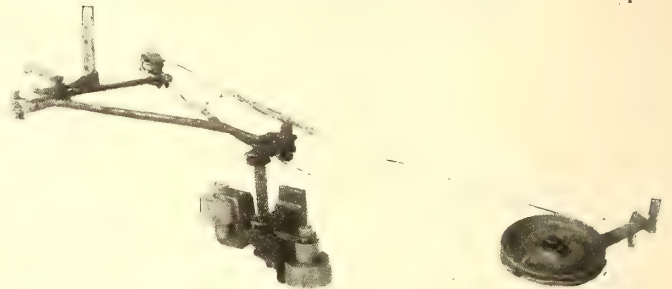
SHOWING METHOD FOR ATTACHING TO CAR TRUCK.
